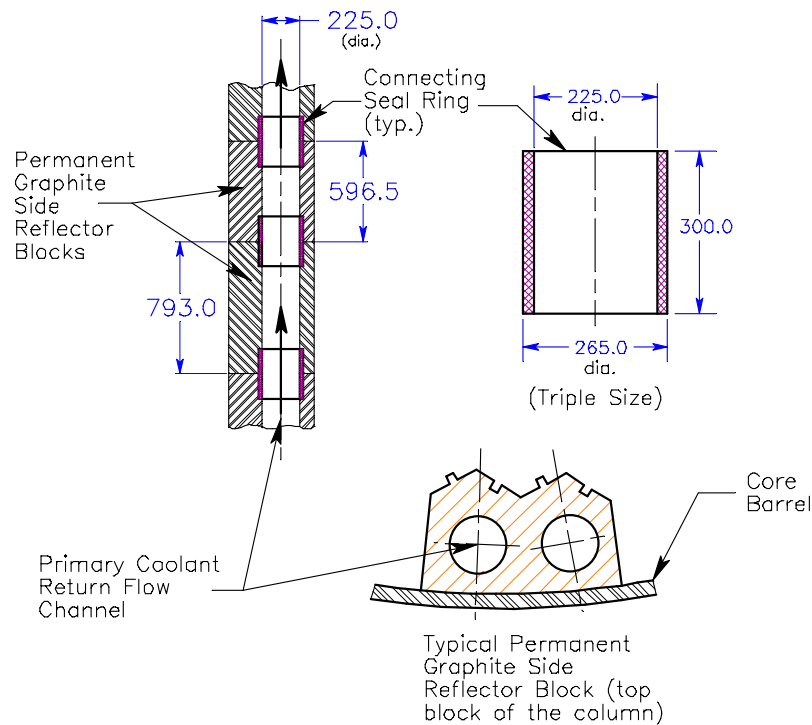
PSR seal sleeve concept for primary coolant passages in PSR blocks
